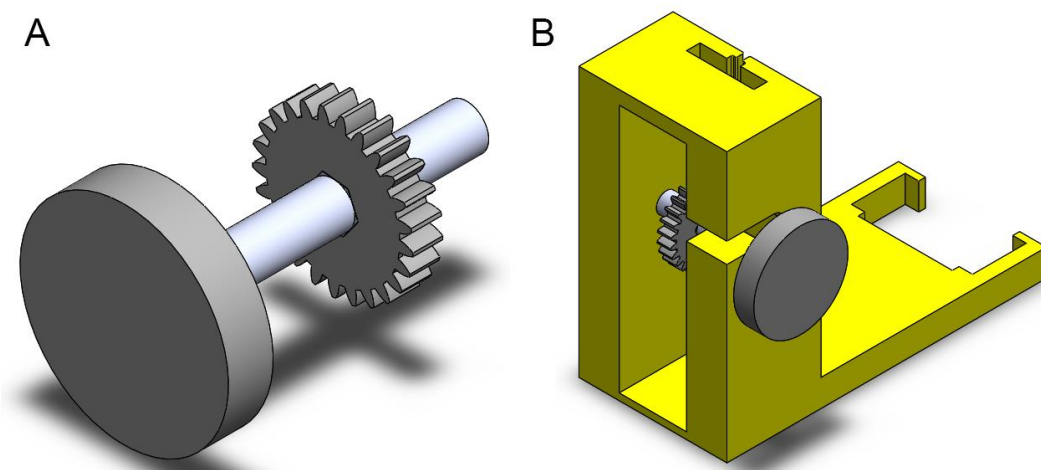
A) Mechanism Isometric view. B) “L” structure with the where the mechanism can be located.
